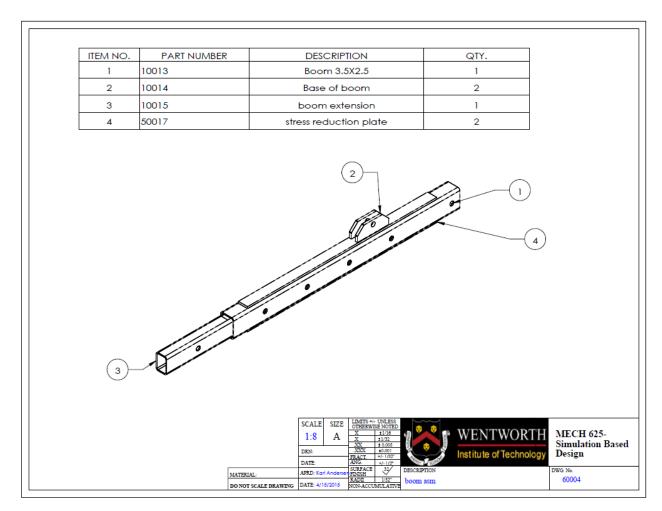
PN#60004 Boom Assembly Redesign Drawing with BOM
